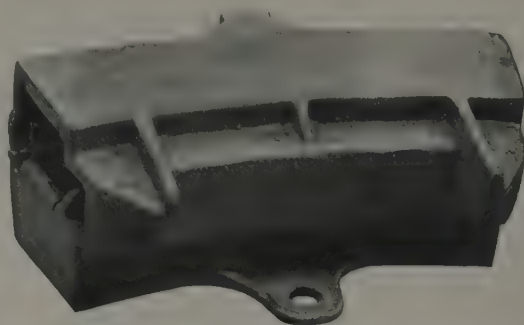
Susemihl Side Bearing for Four-Wheel Passenger Train Car Trucks.
